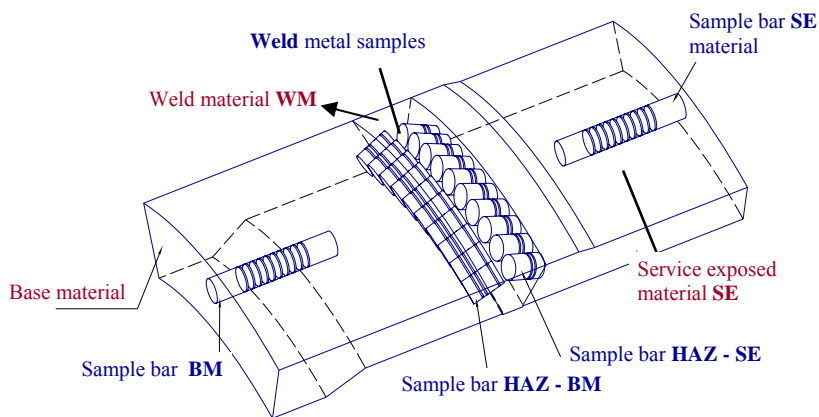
Extracting bars from the INTEGRITY pipe weldment section
